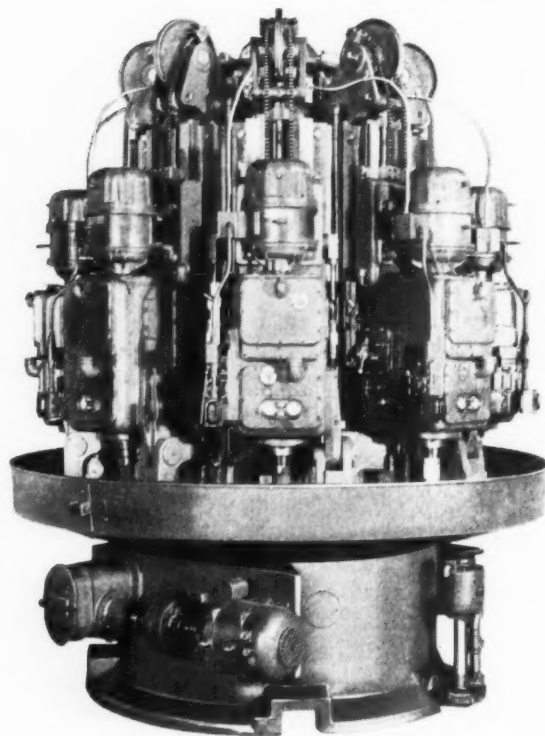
(Above) Eight-spindle Continuous Vertical Lathe which Rough-turns and Crowns 400 Cast-iron Automobile Pistons an Hour
